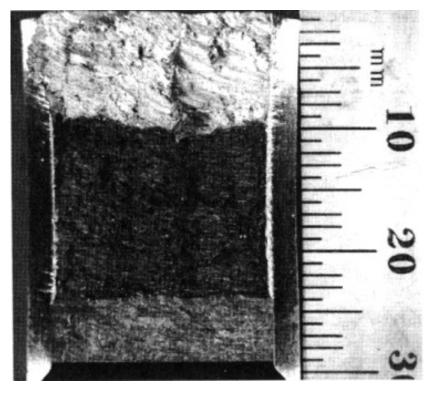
Fracture surface of aged weld metal PWWO tested at 290°C
